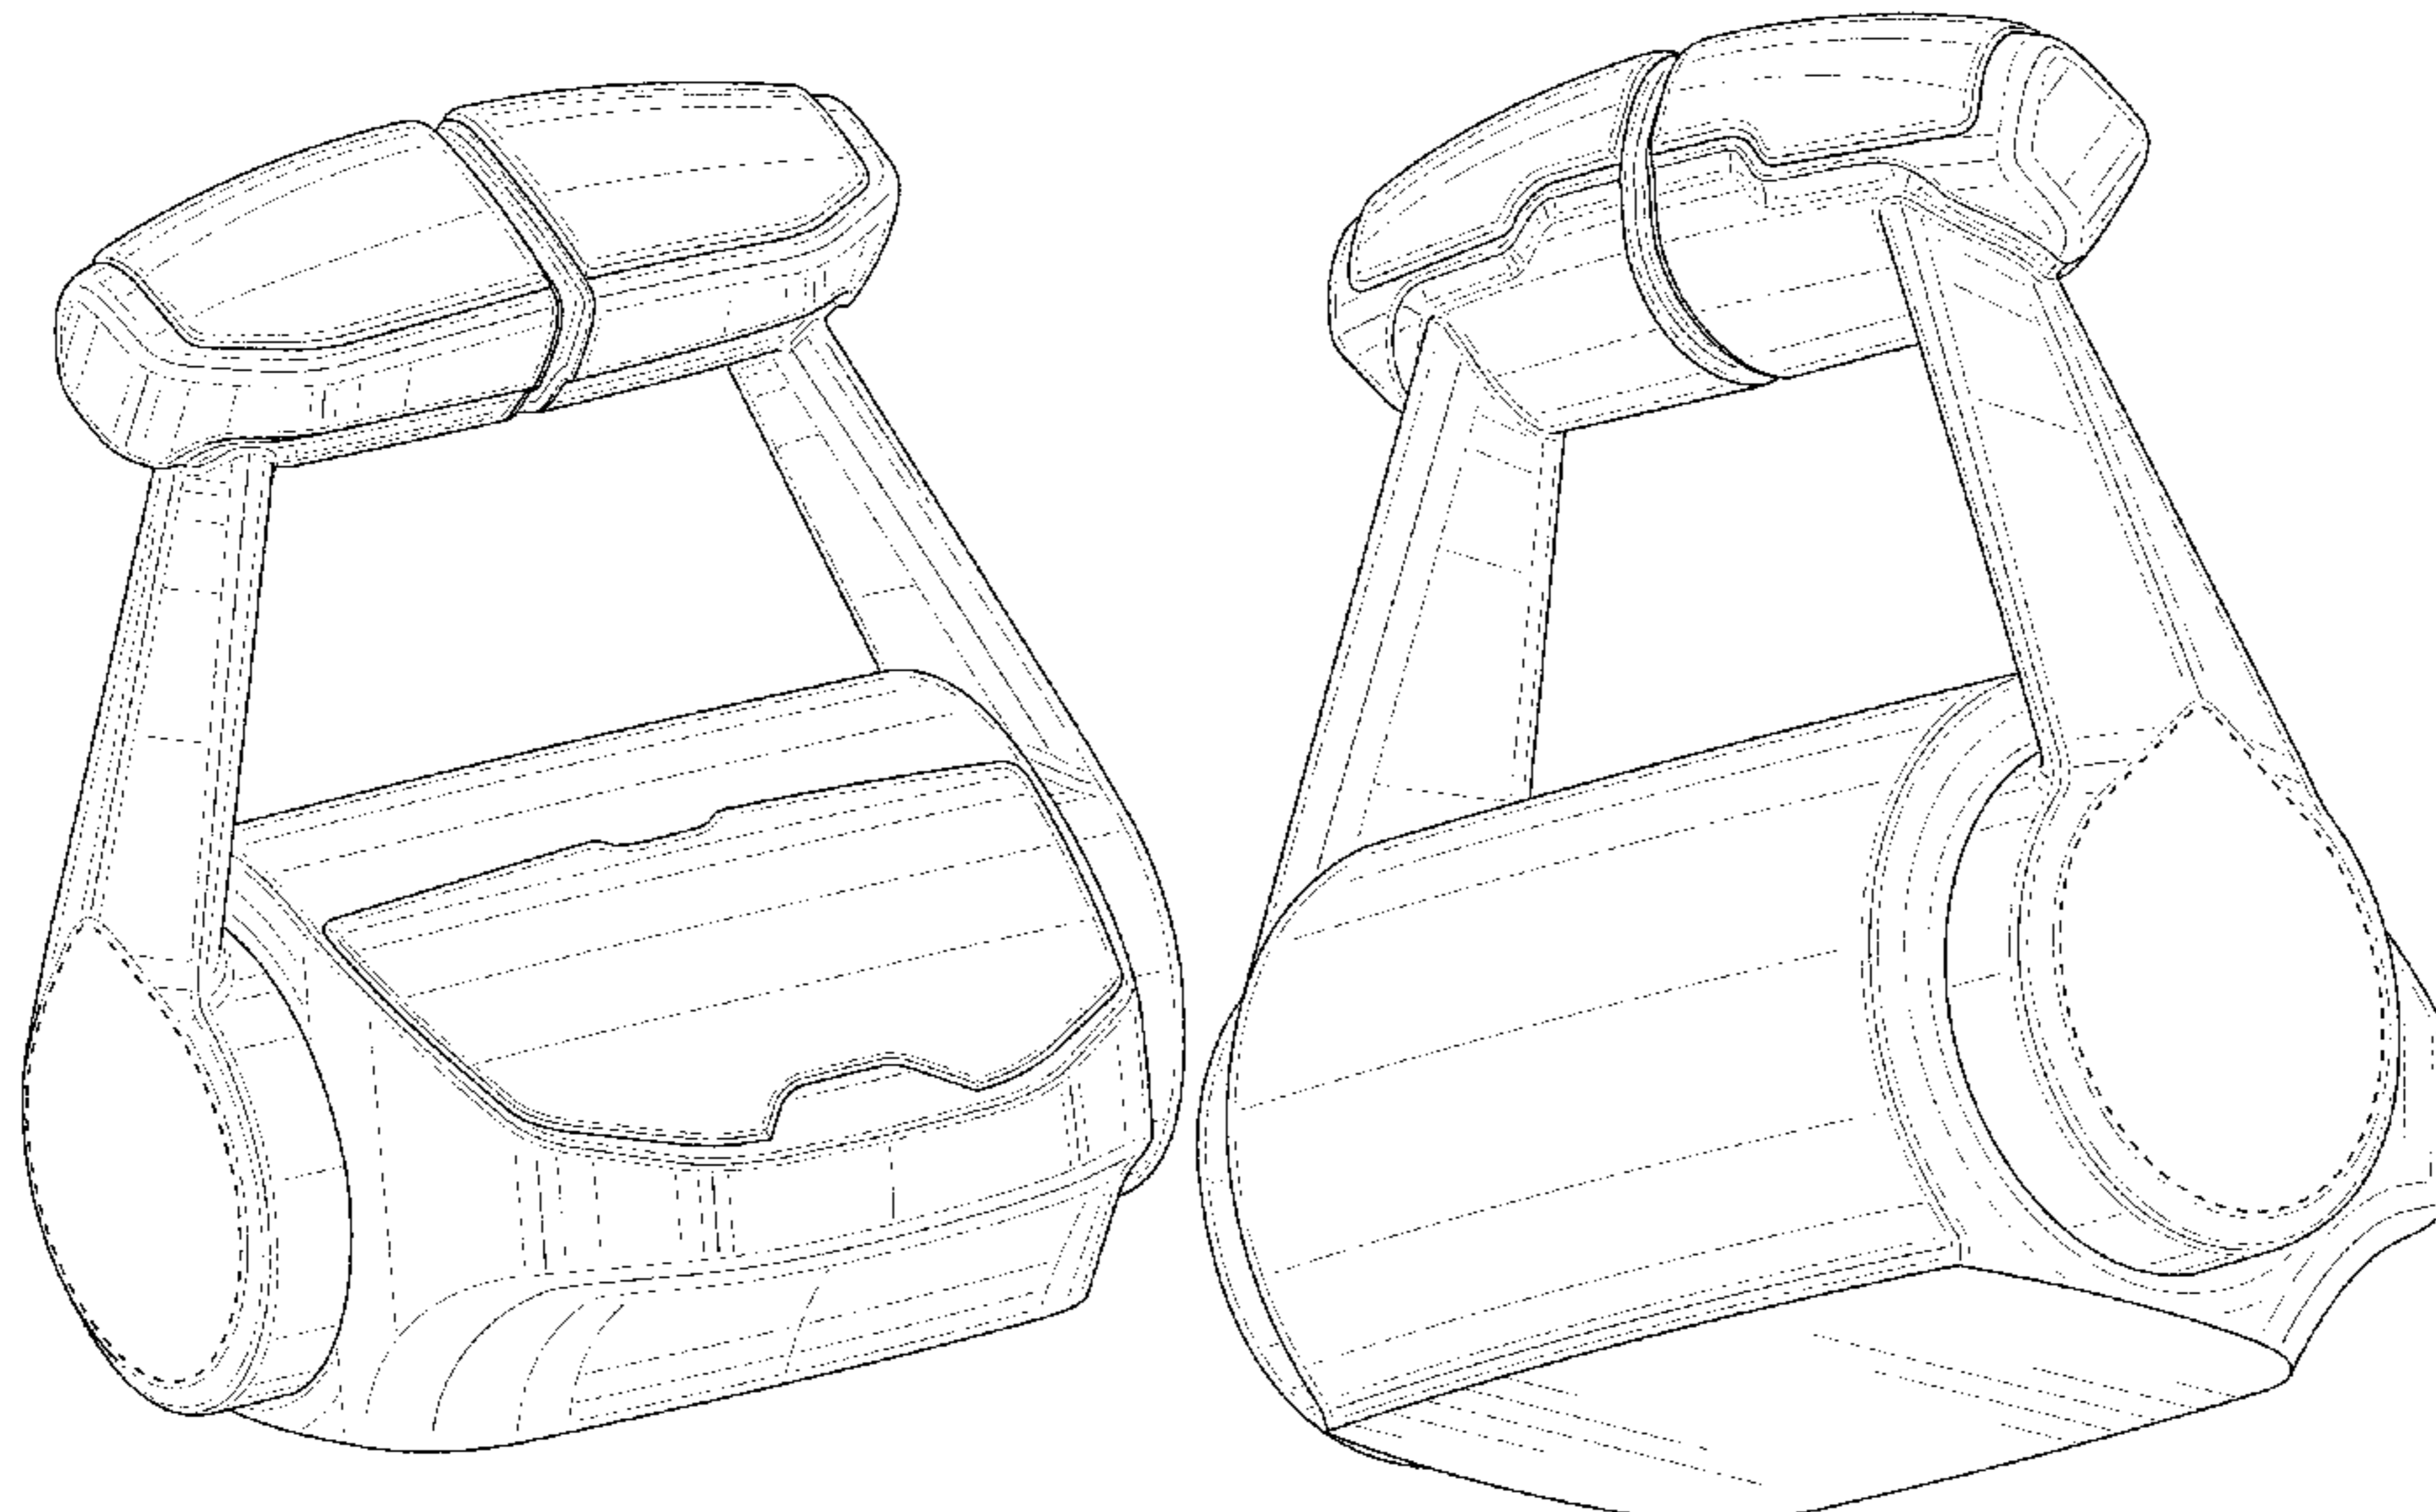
is a front, top, left perspective view of a lever head showing the new design;
